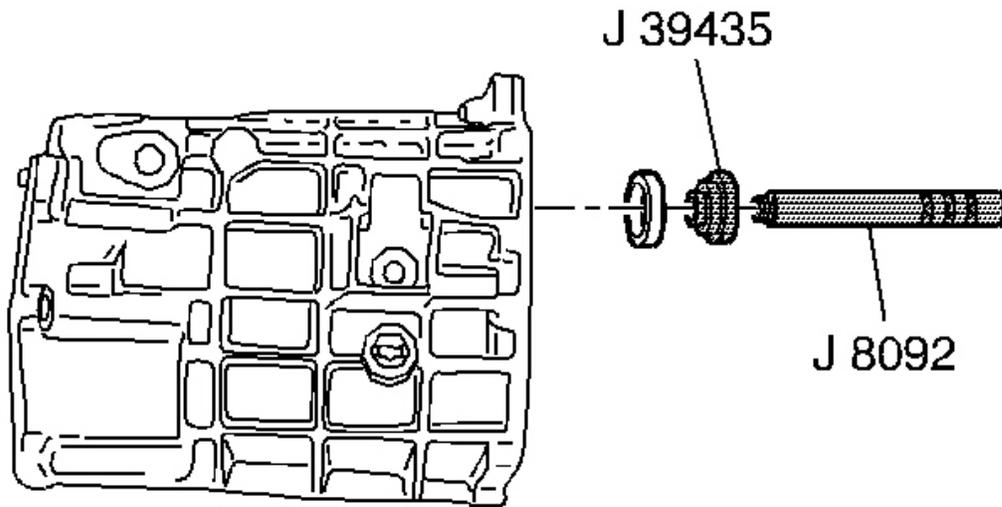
Installing Mainshaft Bearing Race Using J 8092 & J 39435
